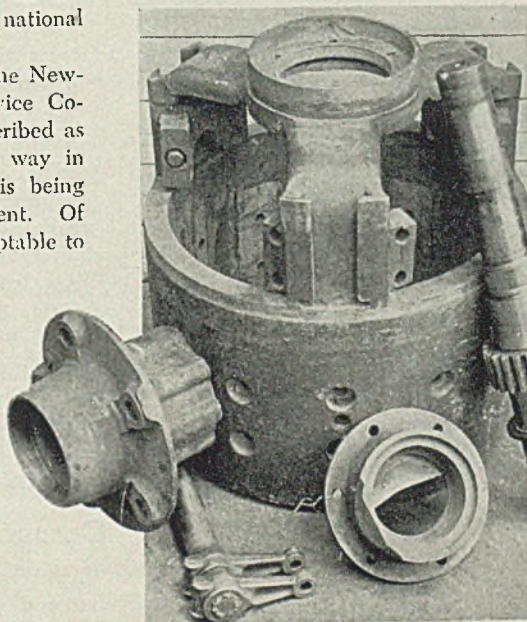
(Lower left, center)—Bus parts in various stages of metallizing, including air compressor crankshafts, drive shaft yokes, clutch throwout shaft and lever assembly, transmission shaft, differential pinion shaft and universal joint crosses
